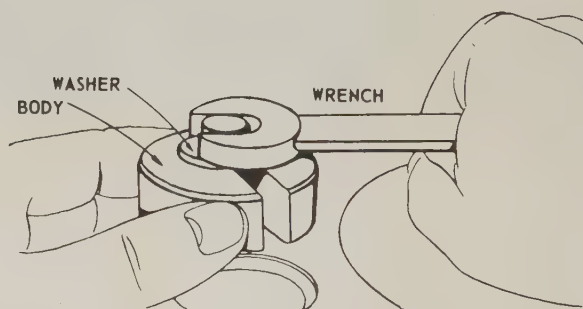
Pulling the valve-seat insert. (Briggs & Stratton Corporation)
